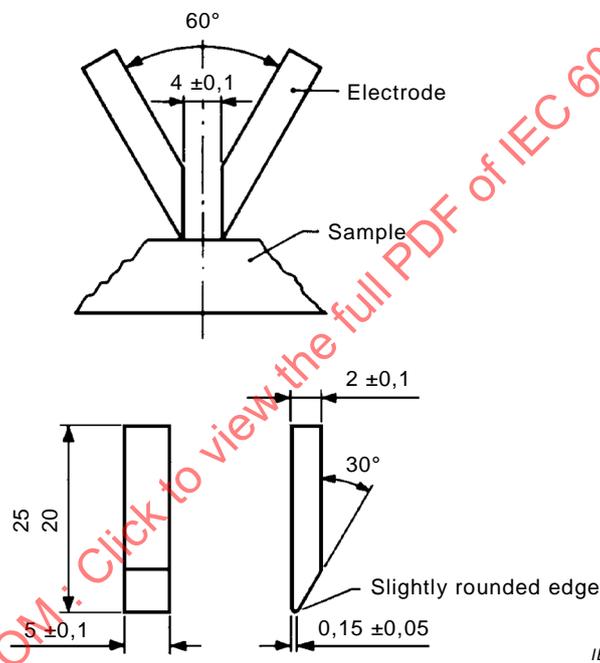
Arrangements and dimensions of the electrodes for the tracking test
